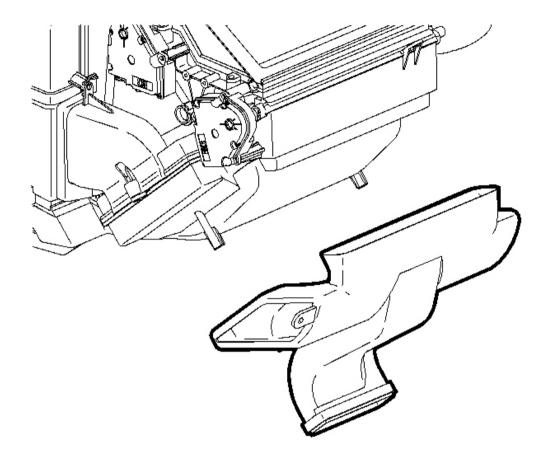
Defrost Actuator, Screws & Evaporator Case Assembly Courtesy of GENERAL MOTORS CORP.
